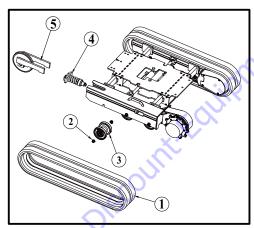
Replacement Roller Lower Wheel And Tracks Adjuster
